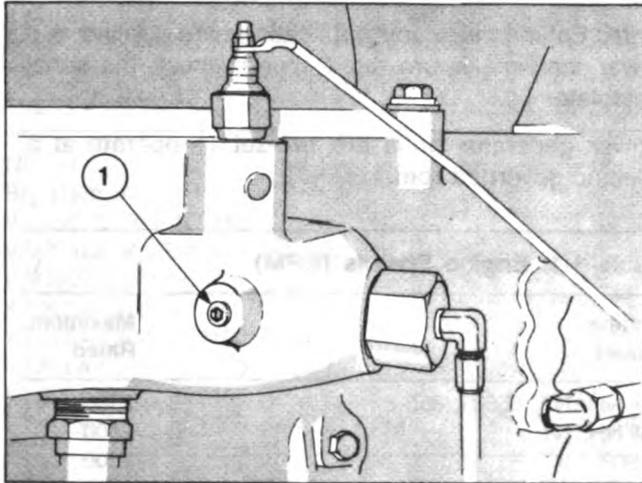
, (OM1006L). Glow plug inspection hole NT-855 C.I.D. Engine
